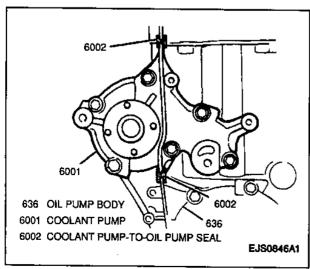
Rubber Oil Pump-To-Coolant Pump Seals
